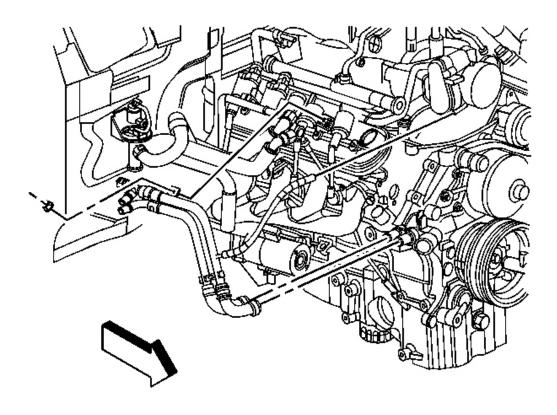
View Of Auxiliary Heater Inlet & Outlet Hoses/Pipes Courtesy of GENERAL MOTORS CORP.
